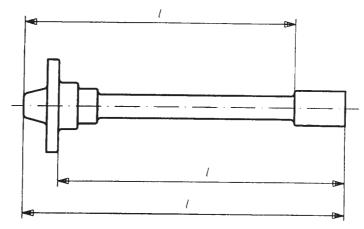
Application of length tolerances to double-ended upset forgings
